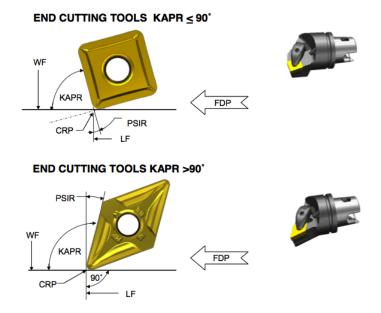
Cutting Tool Measurement Diagram 5 (Cutting Item – ISO 13399)
